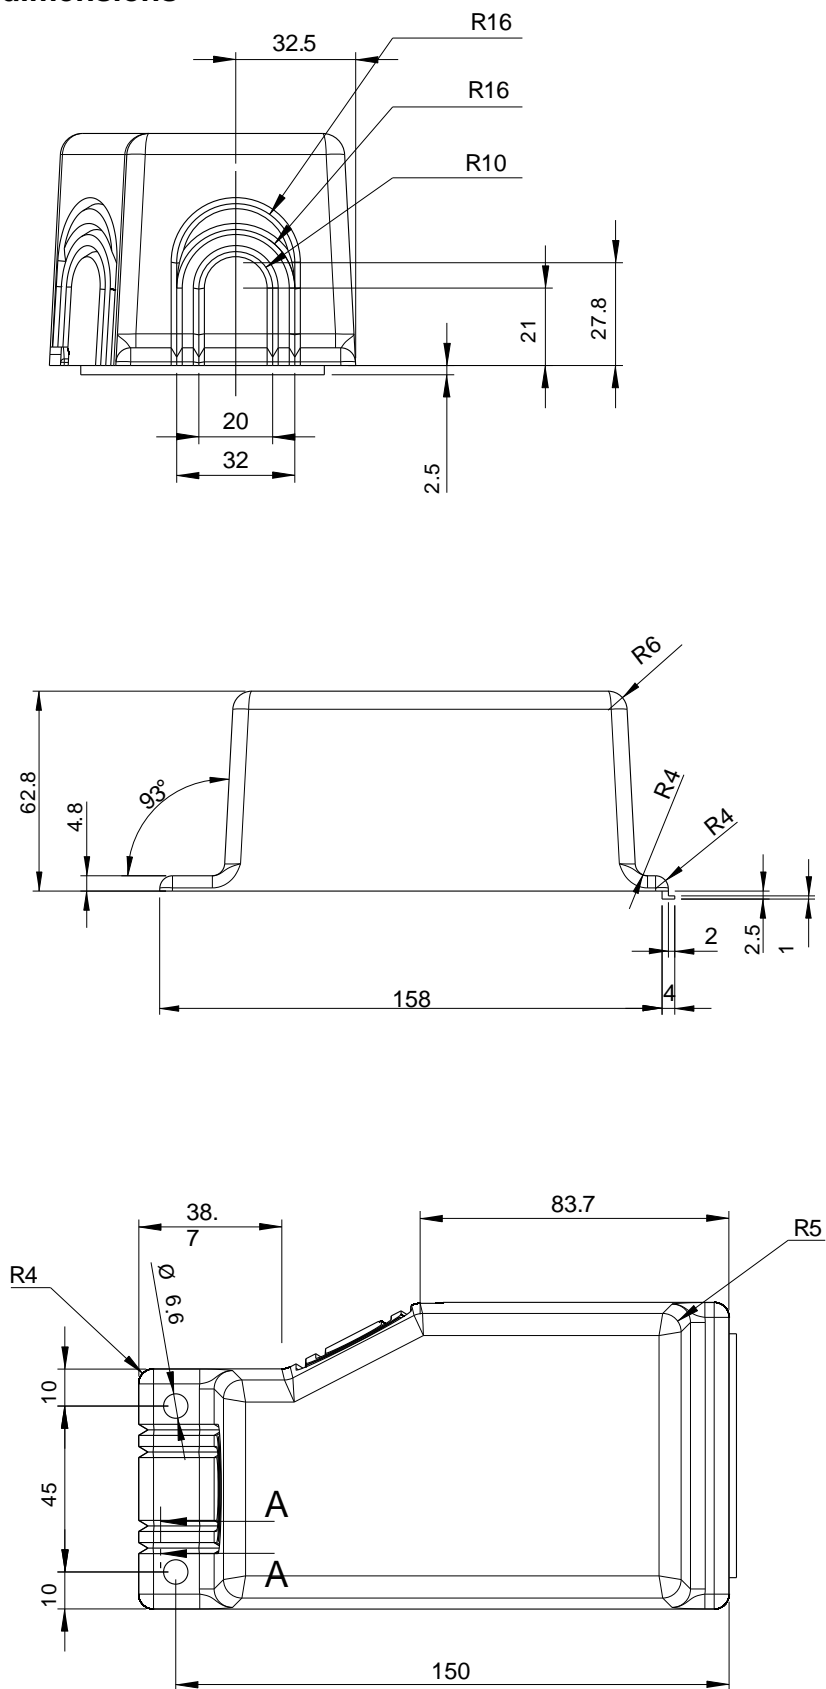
AC-PACOB dimensions for TopCon devices in mm.
